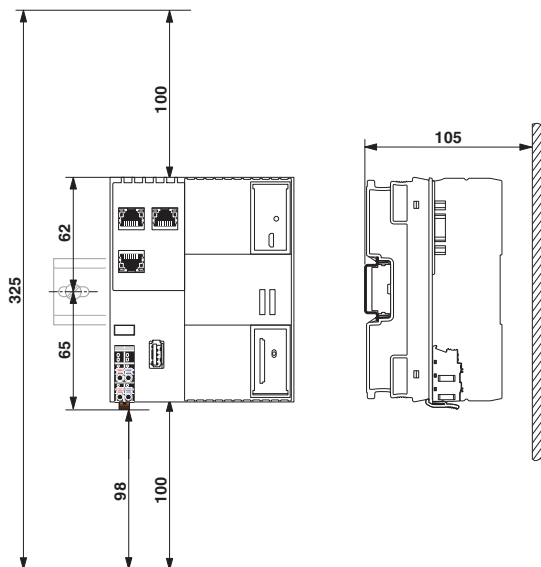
Mounting distances: AXC 305x controller (dimensions rounded)
